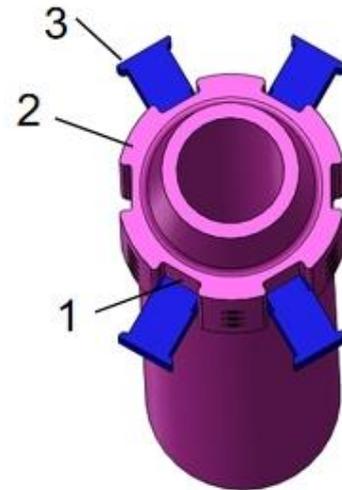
Self-balancing Screwing and Unscrewing Device
